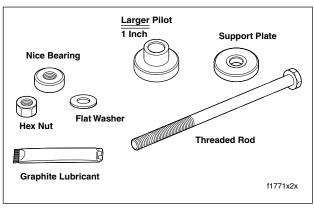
Rear Wheel Bearing Installer Tools (Part No. HD-44060)
